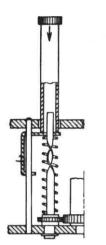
A metal strip or square rod can be twisted to make a long-lead thread. It is ideal for transforming linear into rotary motion. Here a pushbutton mechanism winds a camera. The number of turns or dwell of the output gear is easily altered by changing (or even reversing) the twist of the strip.
